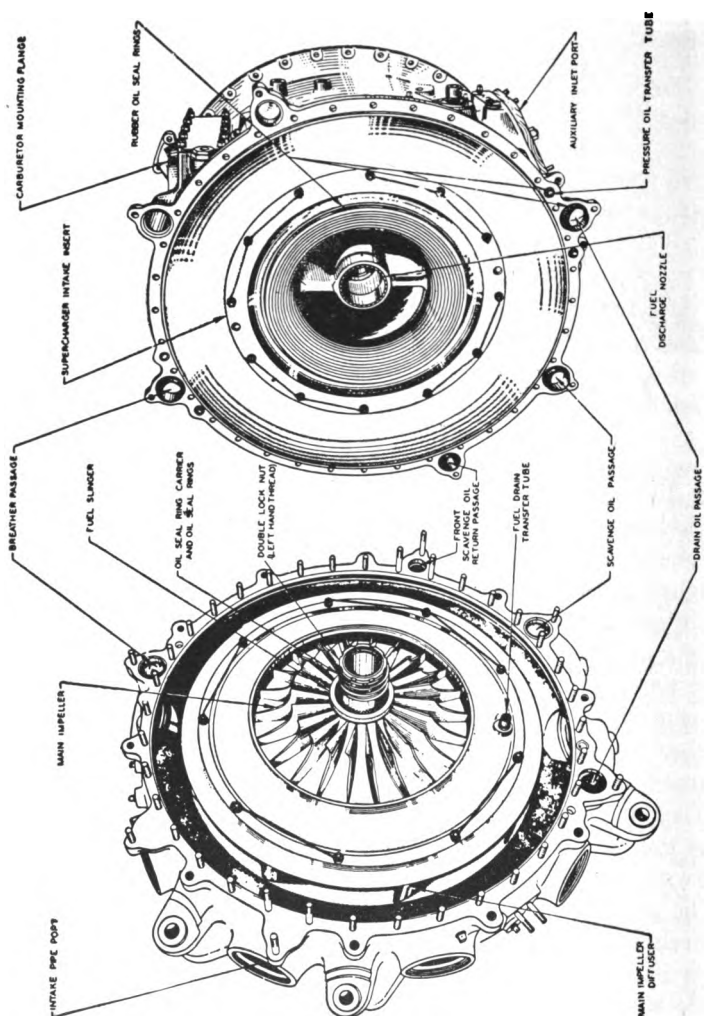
Rear of main supercharger and front of supercharger inlet rear section.
